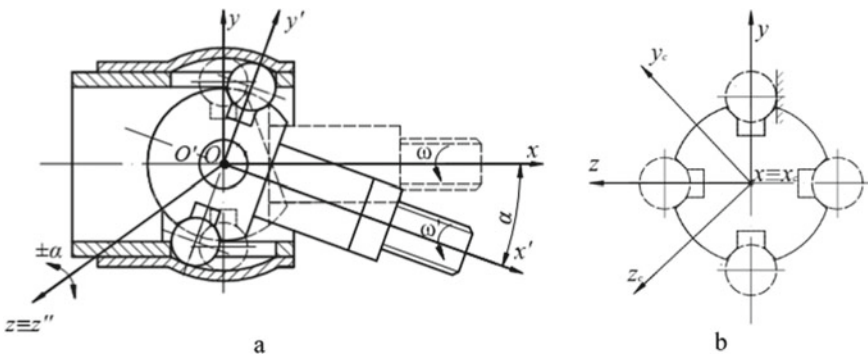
Schematic model of swivel-joint drive: a – side view; b – front view
